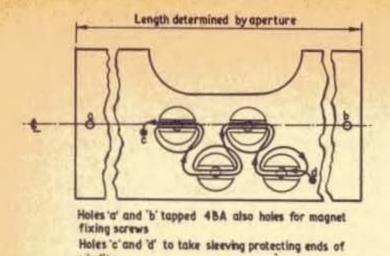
Brass plate with the magnets mounted and winding direction shown
